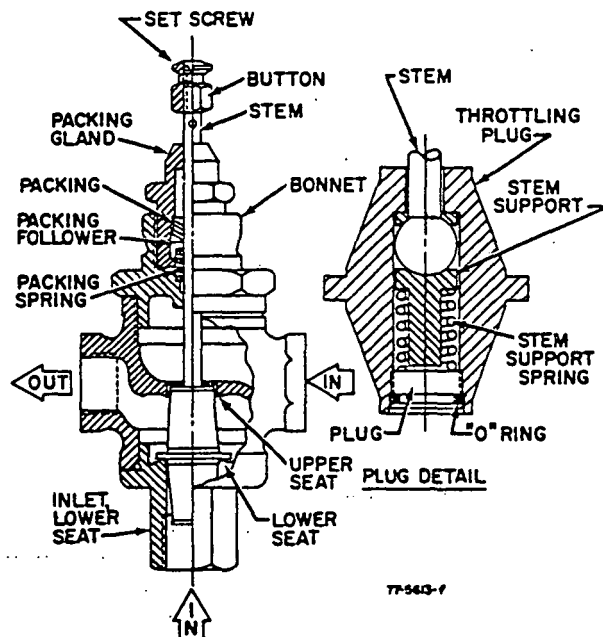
Cutaway of Typical V5013A Screwed Type Body.
